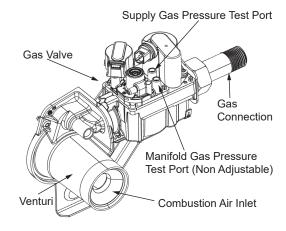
50 and 75 Gallon PX52 - Gas Valve Assembly
